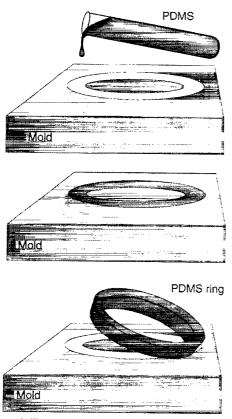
Schematic illustration of PDMS seal ring fabrication. Liquid siloxane is poured into the mold (top), cured at 60°C for 24 h (center), and the ring is removed from the mold (bottom).
